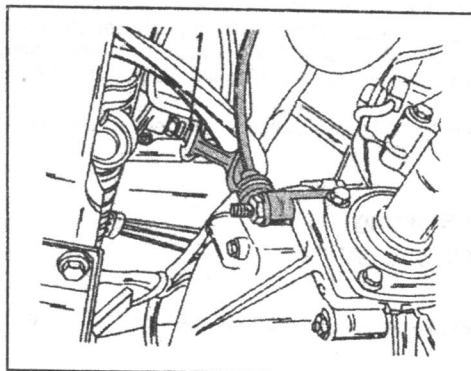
The union nut for the pressure pipe (1) can be found at the location shown.
